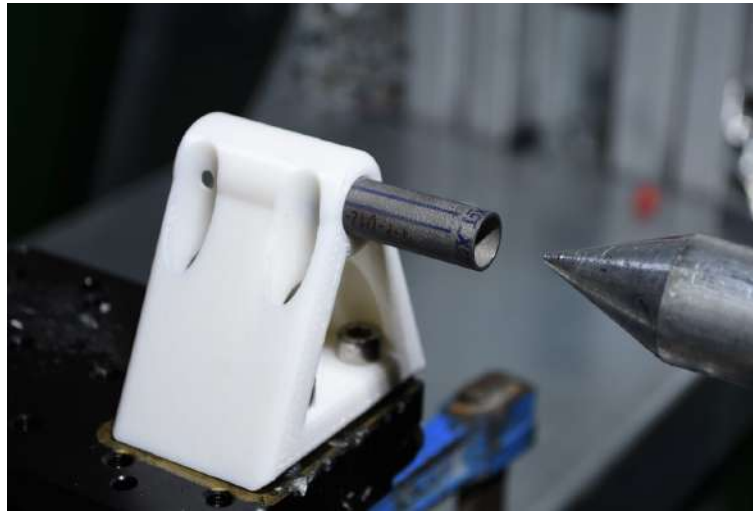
3D printed AlSi10Mg hollow cylinder specimen, mounted on the PLA support before the test.
